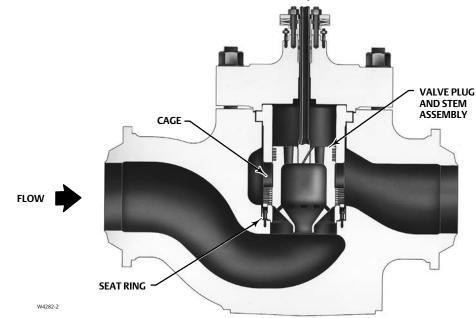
Sectional of NPS 20 Fisher EHD Control Valve Assembly
